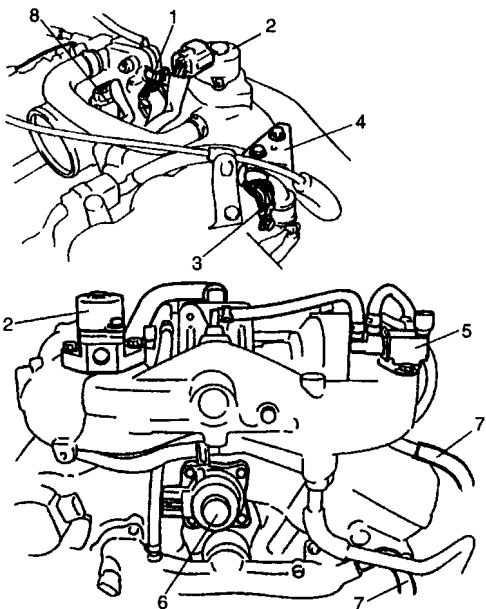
Disconnecting Accelerator Cable And A/T Throttle Cable From Throttle Body
